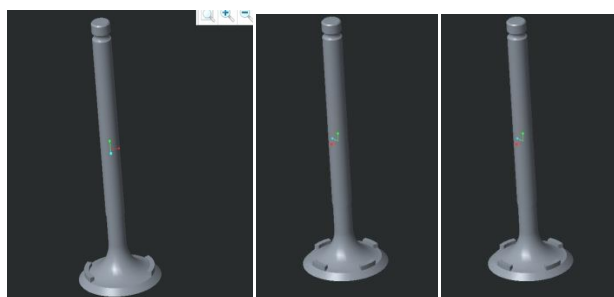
Type 1 inlet valve (valve with masks on its head)
